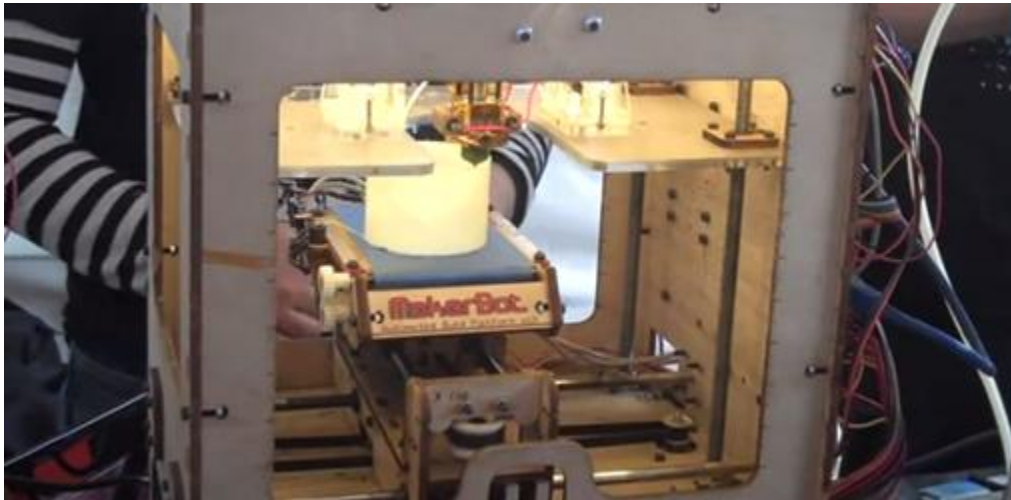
MakerBot prints a cylinder, 2010. (only for illustrative purpose) (www. Tpc. Com)
